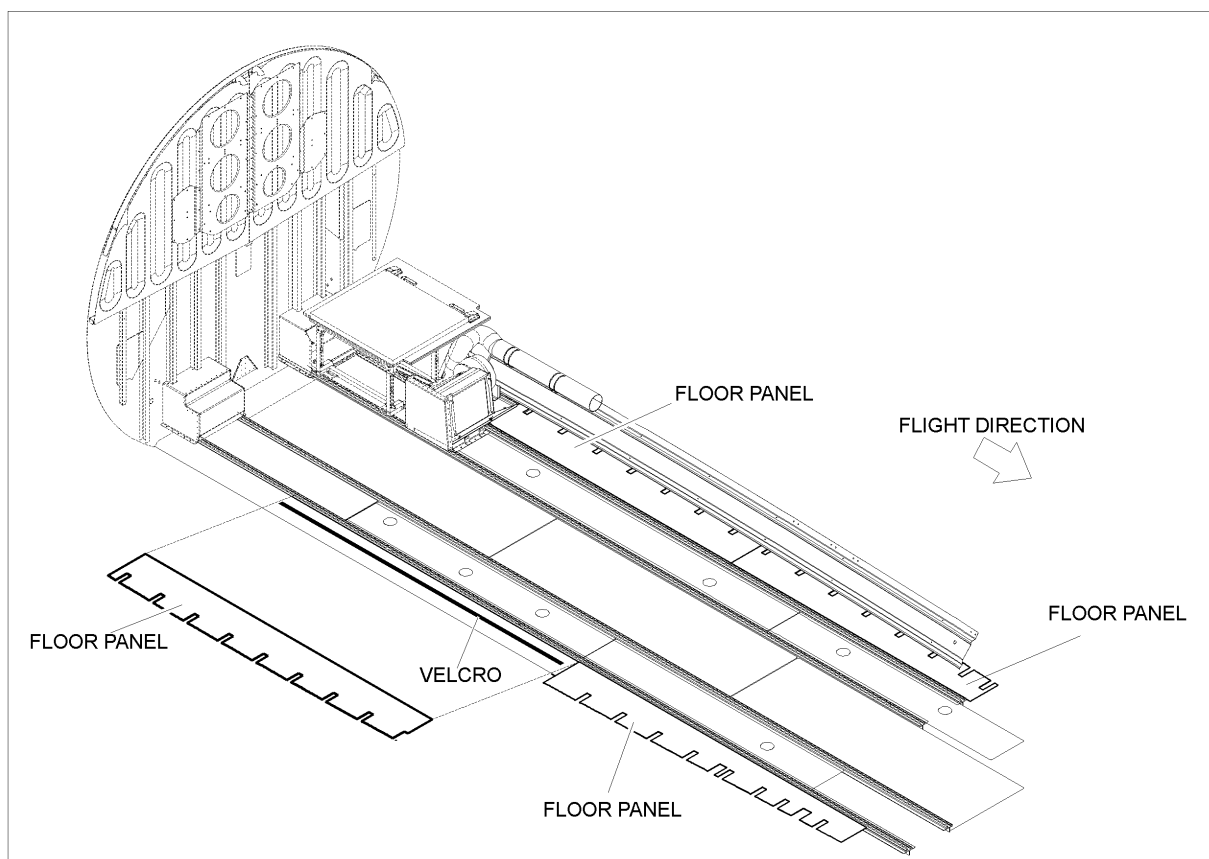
Floor Panels (Ferry Flight Configuration) - Removal
